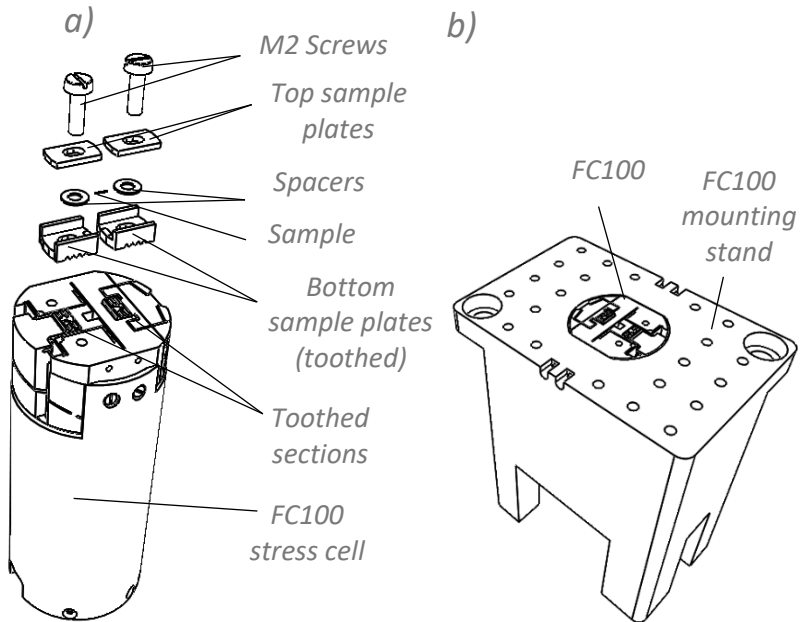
a) The FC100 cell with its sample plates and spacers labelled. b) the FC100 is provided with mounting stand so that it can be held in position during sample mounting. This stand can be fitted into a TB100 mounting table for extra control during sample mounting.
